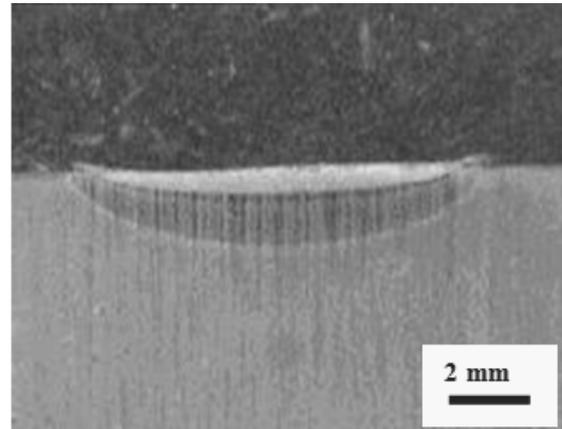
Shape and thickness of cross-section of the laser remelted samples, alloyed with laser power of 1.2 kW, TaC
